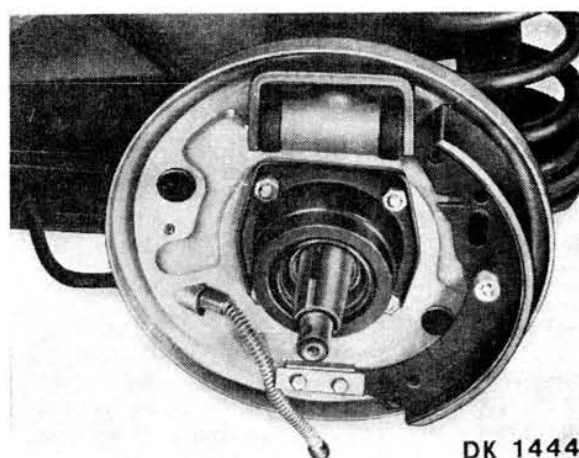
/2 - Holding down Wheel Cylinder Pistons with MP 6-109 Fixture
